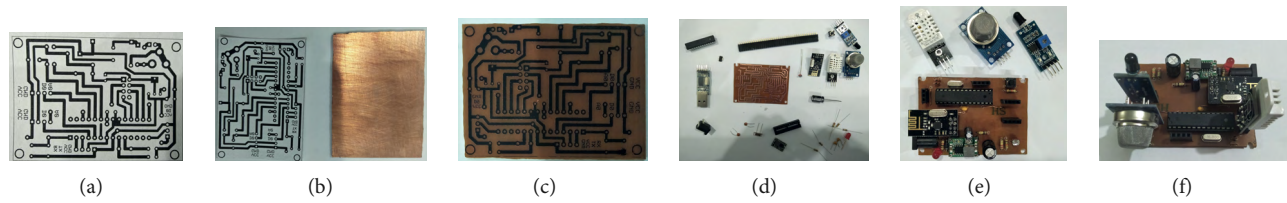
Different phases of hardware design: a) printed circuit on photo sheet, b) PCB copper sheet, c) ironed PCB, (d) hardware components. e) components soldered on PCB, f) final WSN fire detection node.
